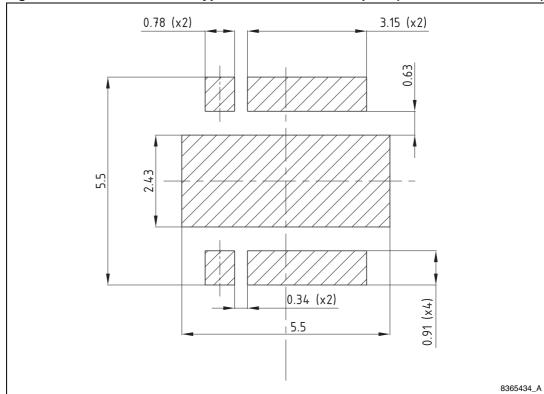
PowerFLAT™ 5x5 type S recommended footprint (dimensions are in mm)
